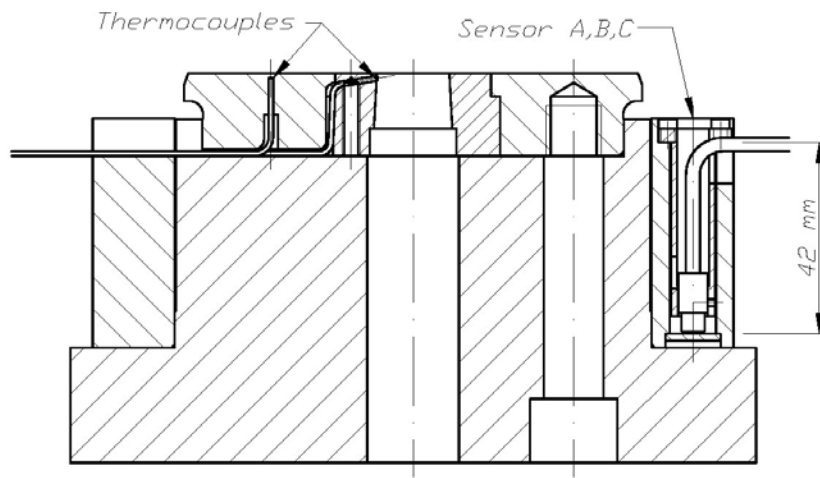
Assembly drawing of the complex rod extrusion die (continued).
